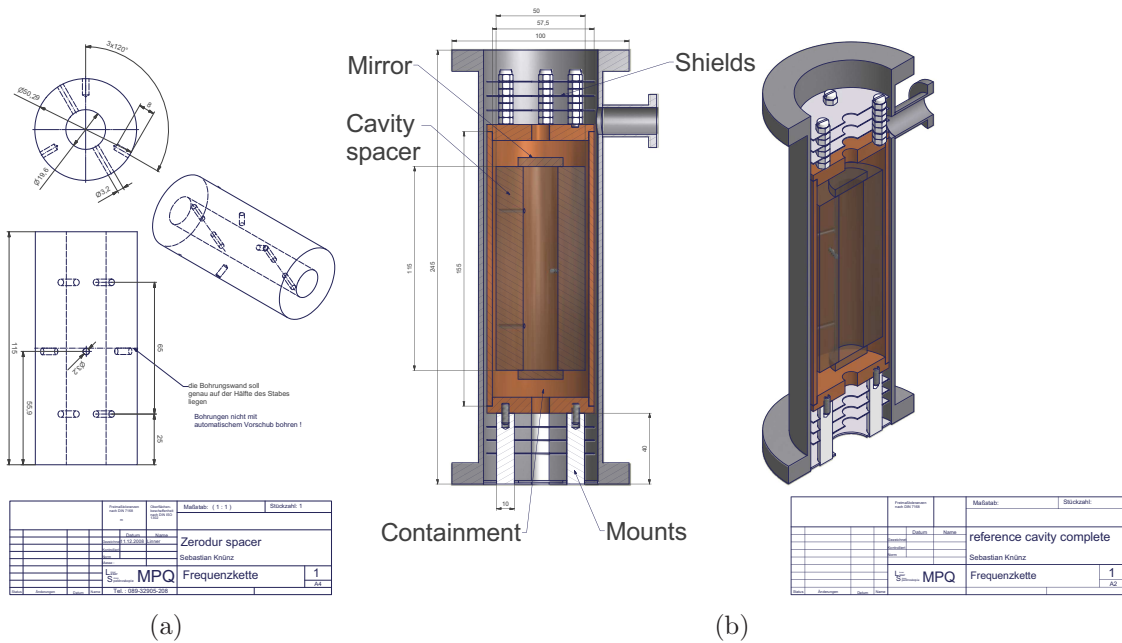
(a) Technical drawing of the cavity spacer. Three mounting holes are located right below half of the spacer length. Four other holes ventilate the cylindrical space inside. (b) Technical drawing of the cavity setup: the spacer is held inside of an Aluminium container. The container is temperature regulated with a heating wire wound around it. Shields on top and bottom of the cylinder improve the thermal isolation. The container with the cavity inside stands on four Teflon spacers in a vacuum chamber.
